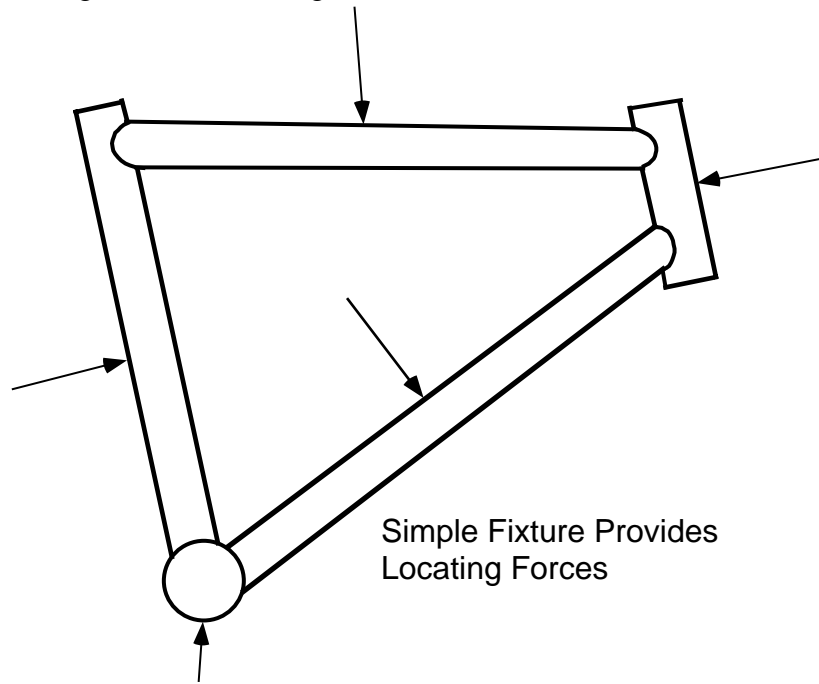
Conventional hard fixture for positioning tubes for welding.
